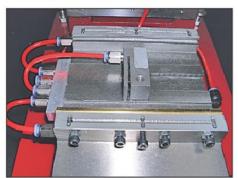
Close up of X axis oiler components "wired up" with red 4mm od tubing.
